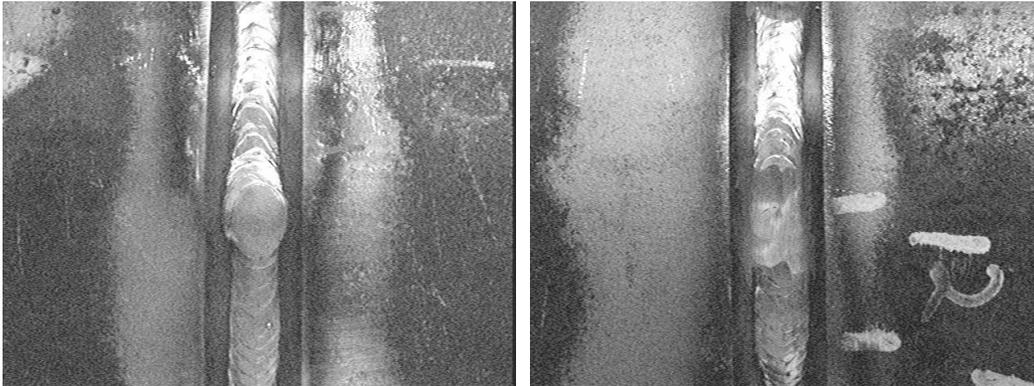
Start and stop location of hot pass before and after preparation for fill passes.
